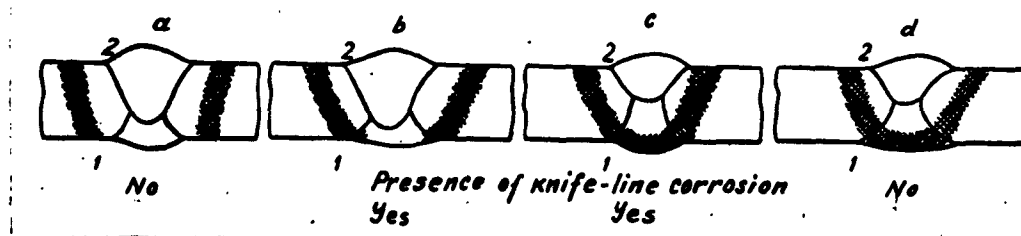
Knife-line corrosion of welded specimens with two-sided welds depending on the size of the weld.
